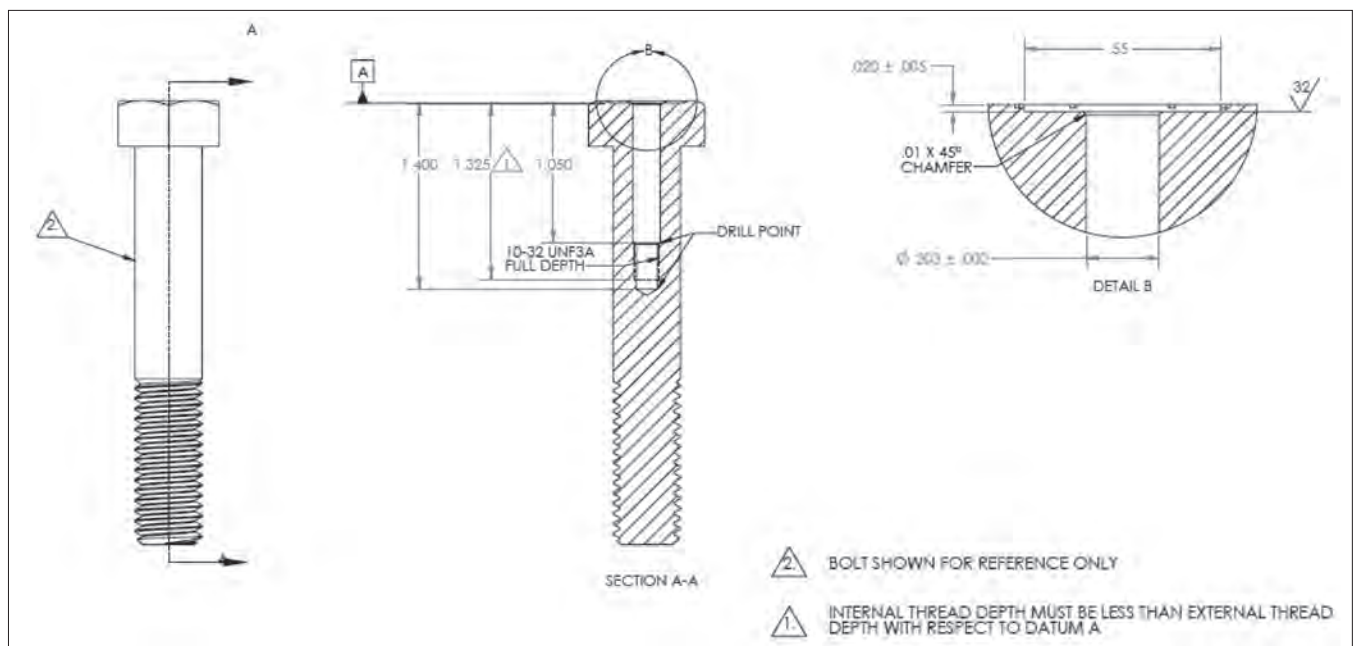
Dimensions of fastener modification to accept Brainy Bolt insert. (Generic bolt shown.)
